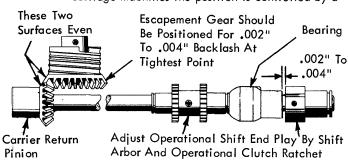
Gear Mesh And Operational Shaft Adjustment
